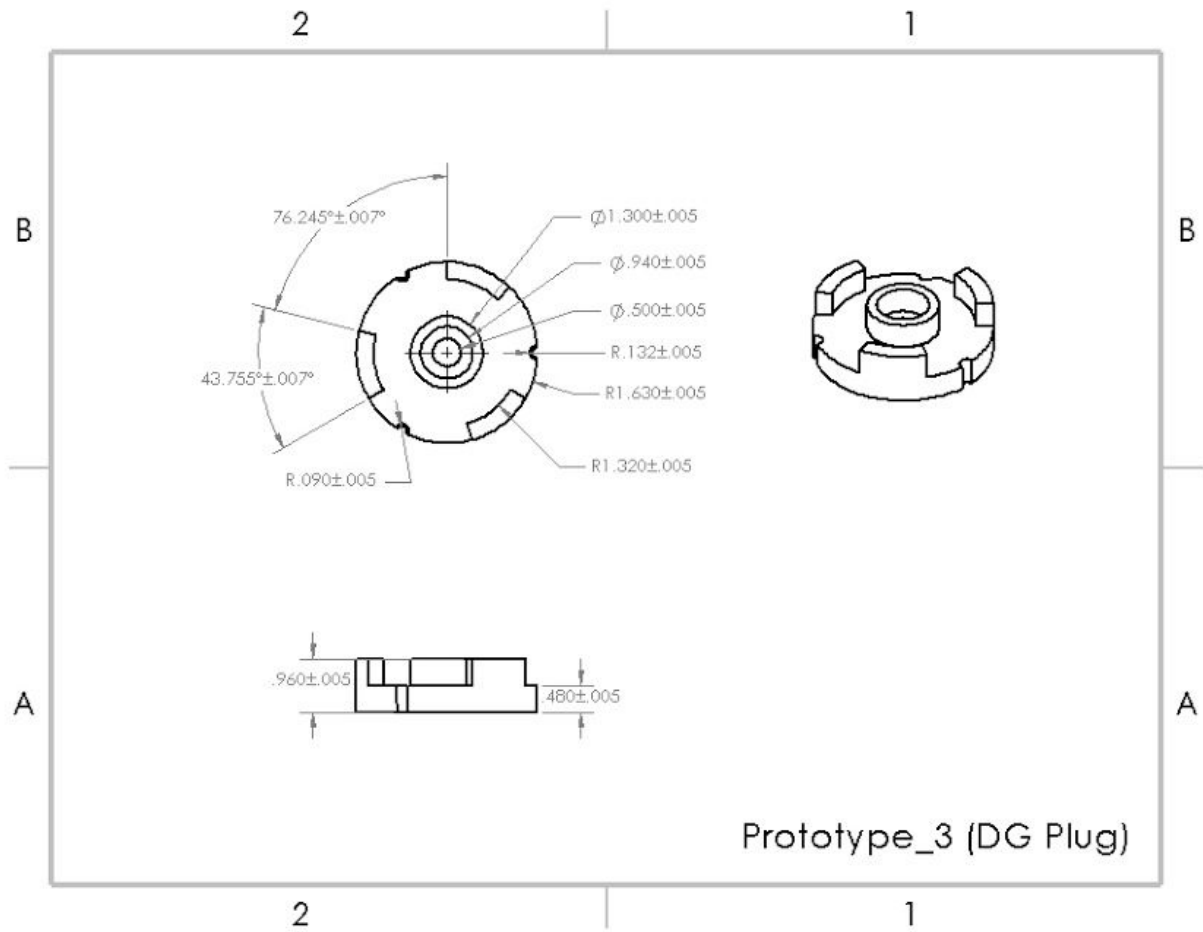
Solidworks 2D Prototype Dependent Gear Plug
